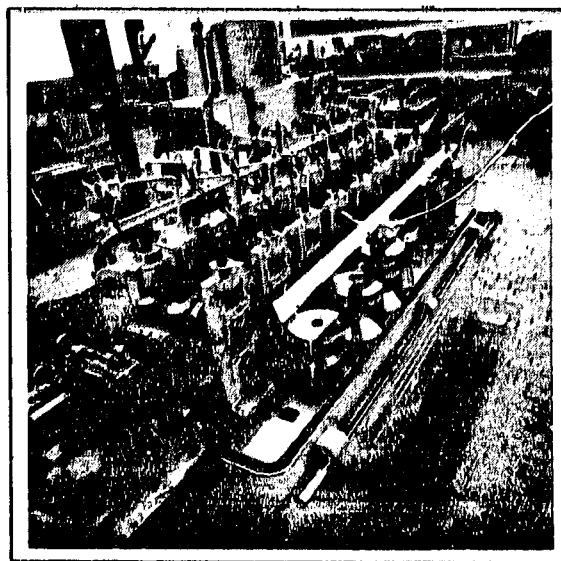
Rolling mill with 1 m beam cap forming tools.
